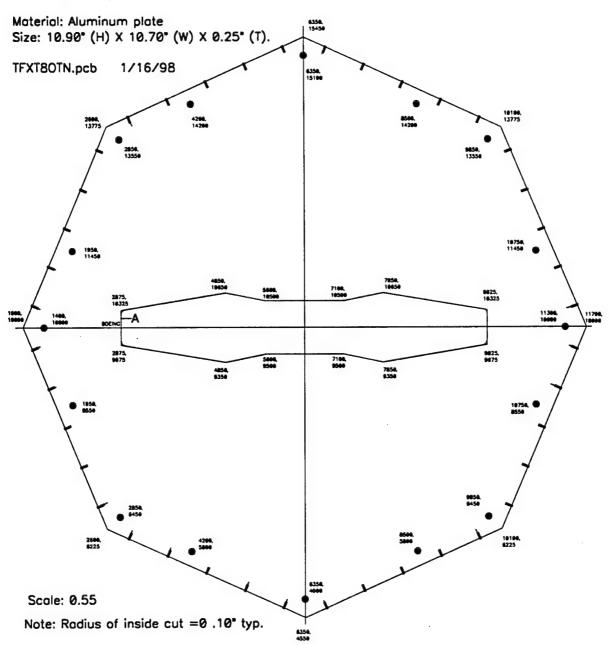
Mechanical Layout of Test Fixture Platform
